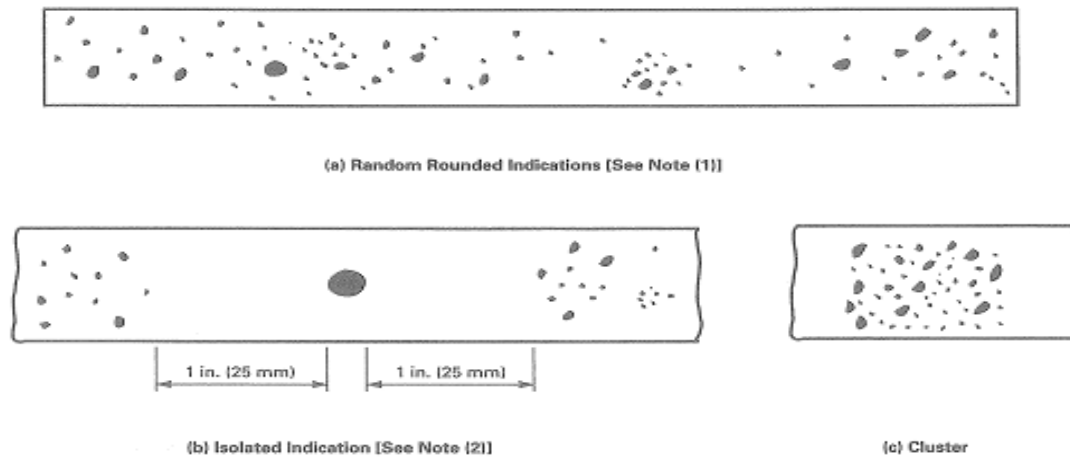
CHARTS FOR t OVER $3/4$ in. to 2 in. (19 mm to 50 mm), INCLUSIVE
